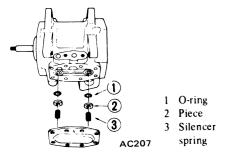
Exploded view of silencer spring, pieces and O-ring
